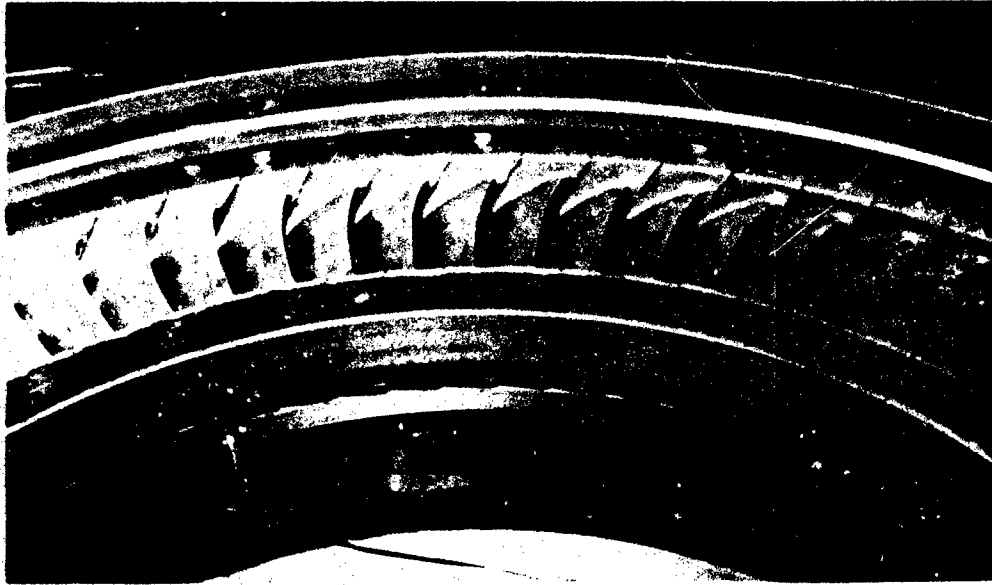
Build I, Full Rear View of Second Rotor Assembly (XPN-18908)
